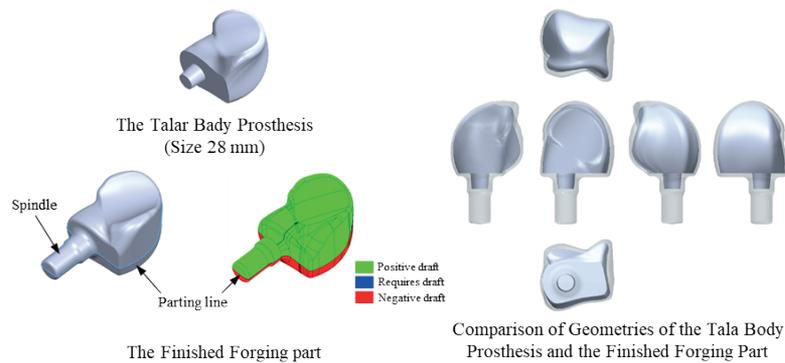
Geometrical shapes of the talar body prosthesis and the finished forging part.
